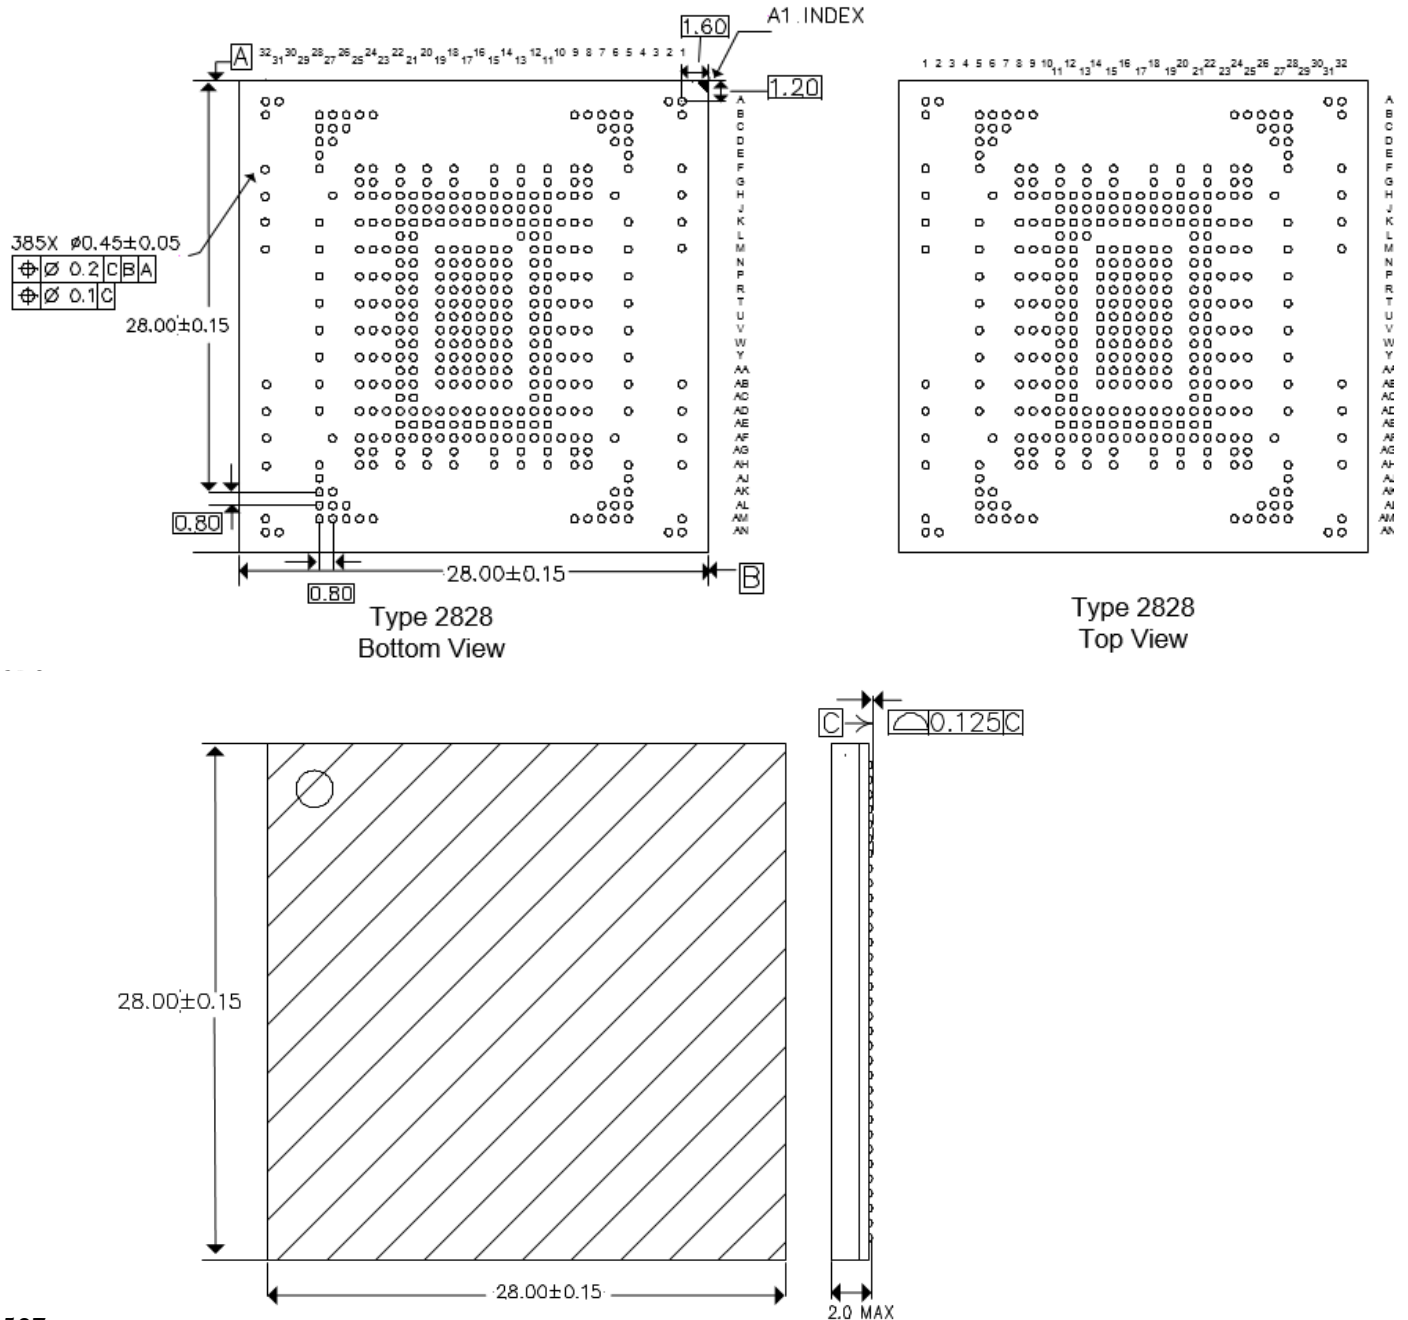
M.2 Type 2828-S5 Mechanical Outline Drawing Example
